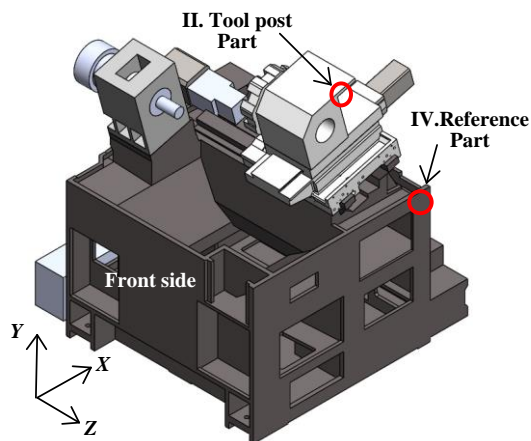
Overall view of the lathe. The CNC lathe XC-100 (Takamatsu Machinery Co., LTD.)
